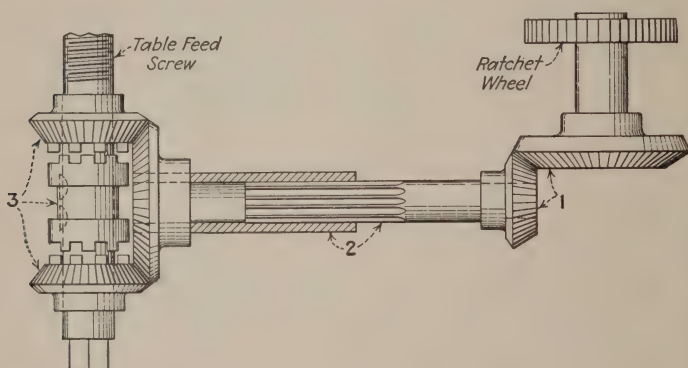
Shows how motion of the ratchet wheel is transmitted to the table feed-screw through bevel gears (1), telescopic shaft (2), bevel-reversing gears and clutch (3). The clutch, shown here in neutral position, is operated by lever (13), Fig. 75.
